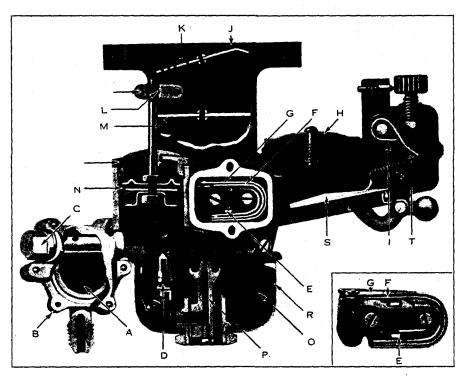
Carburetor, Sectional View, Double Thermostat Type
